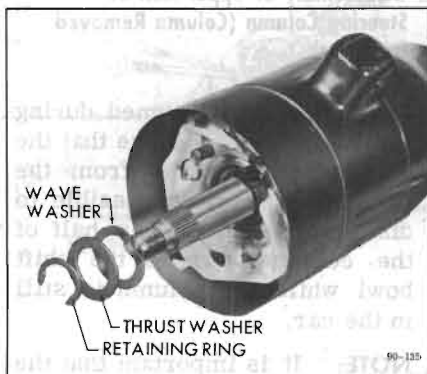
Partial Disassembly of Upper Half of Steering Column
